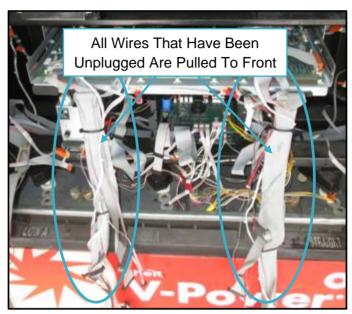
Pull all wire assemblies to front of dispenser
